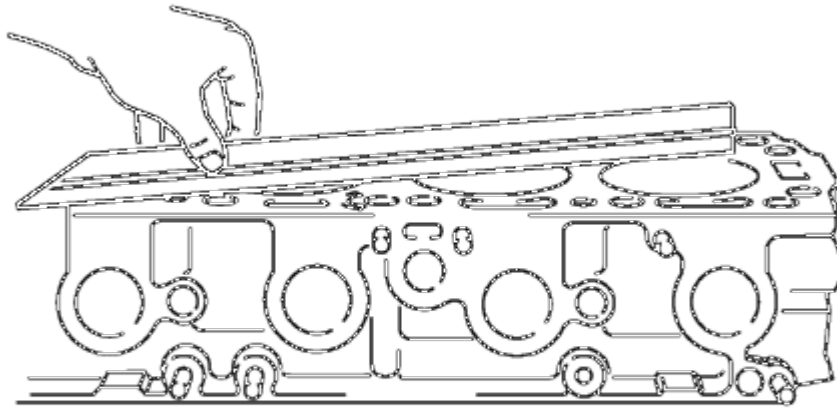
Inspecting Engine Block For Distortion Along Diagonals
